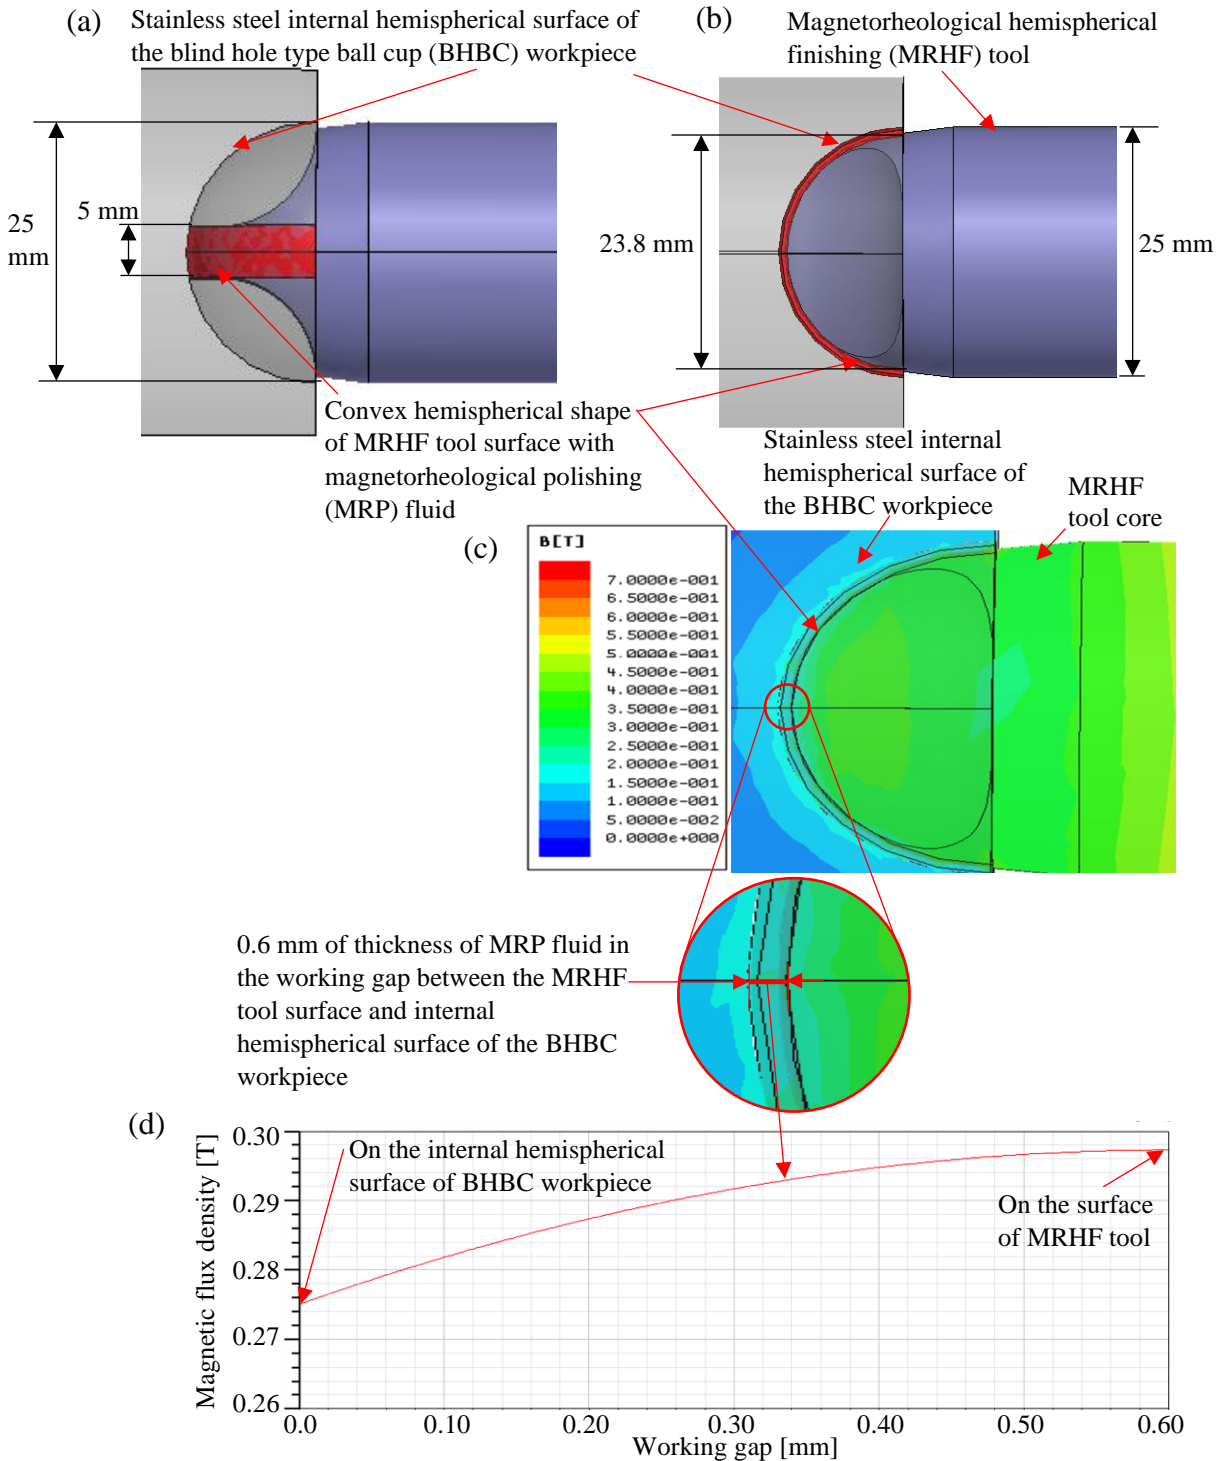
Model of the magnetorheological hemispherical finishing (MRHF) tool along with MRP fluid and the internal hemispherical surface of blind hole type ball cup (BHBC) workpiece of the ball transfer unit (a) when viewing from a side, (b) after 90° rotation, (c) distribution of magnetic flux density and (d) the 2D plot of the flux density in 0.6 mm working gap between the convex surface of the MRHF tool and the internal surface of the BHBC workpiece through magnetostatics finite element analysis.
